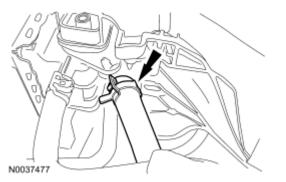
Locating Power Steering Cooler Tube Courtesy of FORD MOTOR CO.
